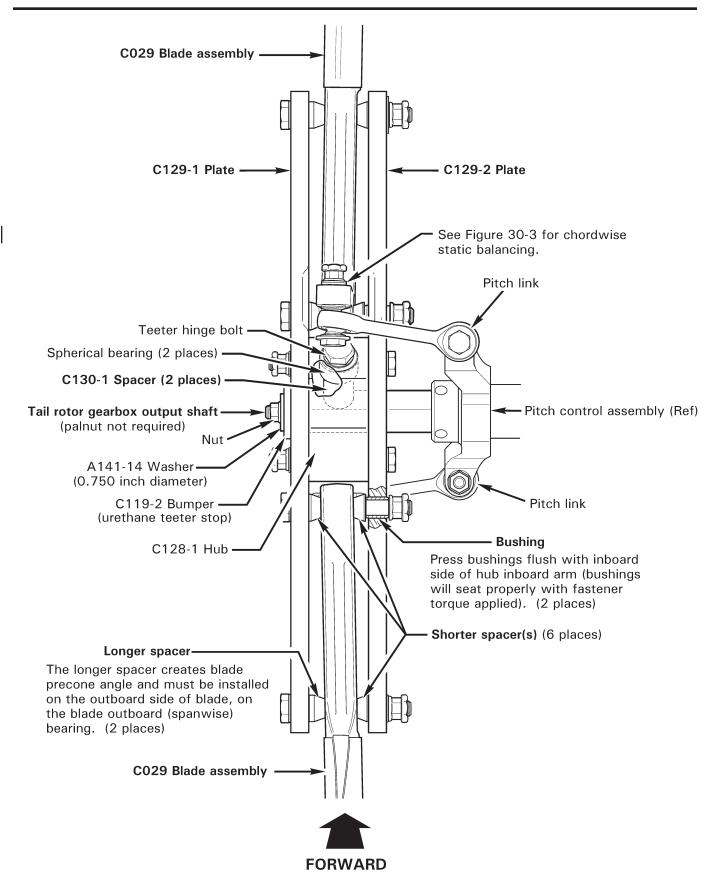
THREE-PIECE HUB TAIL ROTOR ASSEMBLY INSTALLATION
